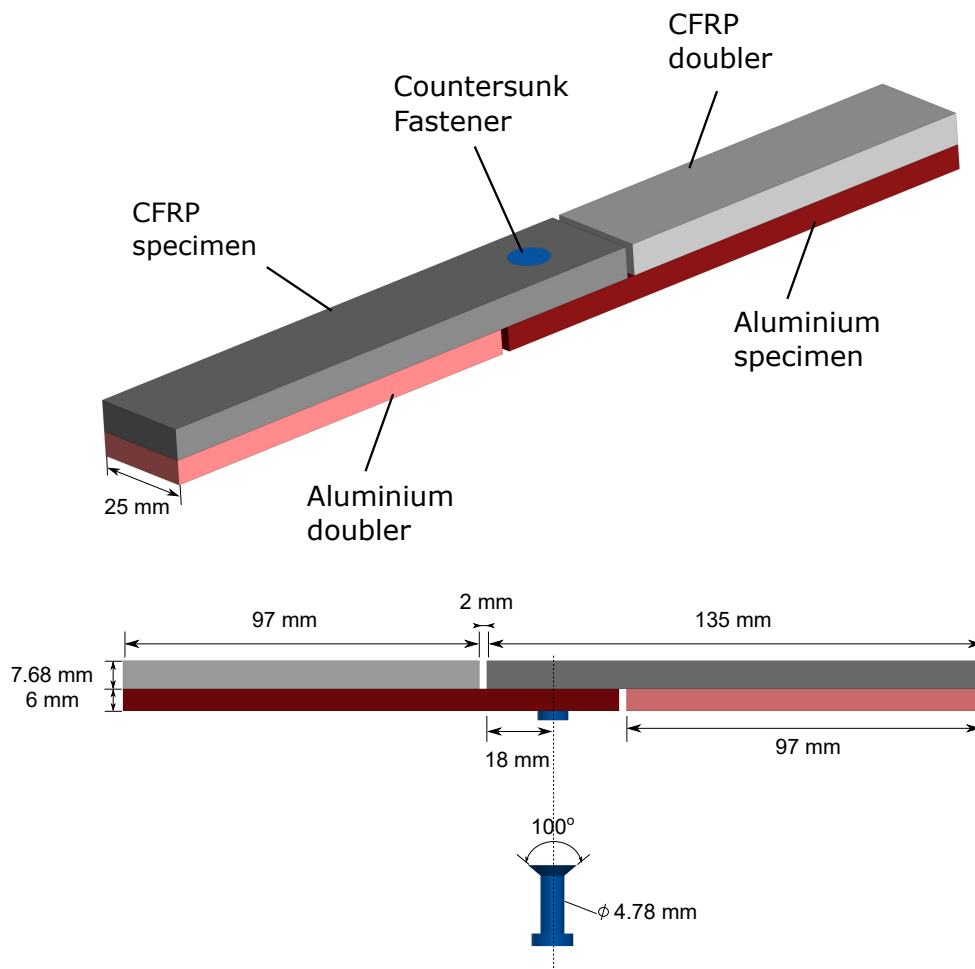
Schematic illustration of the single lap shear bolted joint comprising of CFRP-aluminium plates with a steel countersunk fastener, along with the dimensions of the different parts.
